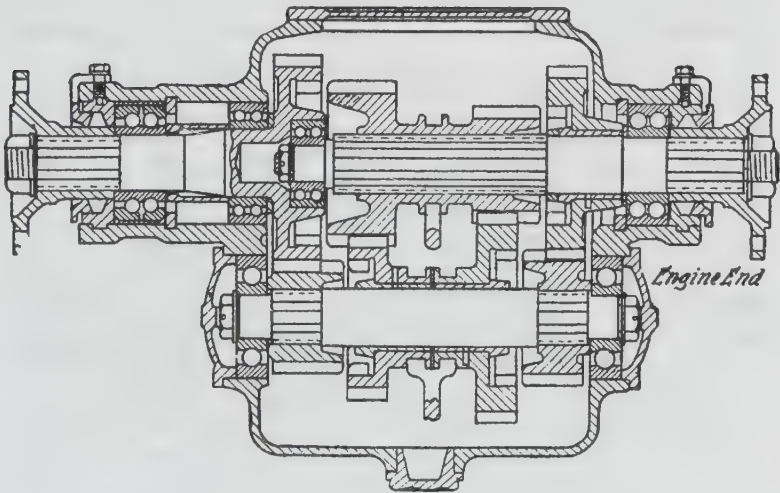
DUX POSITIVE CLUTCH CHANGE GEAR.
